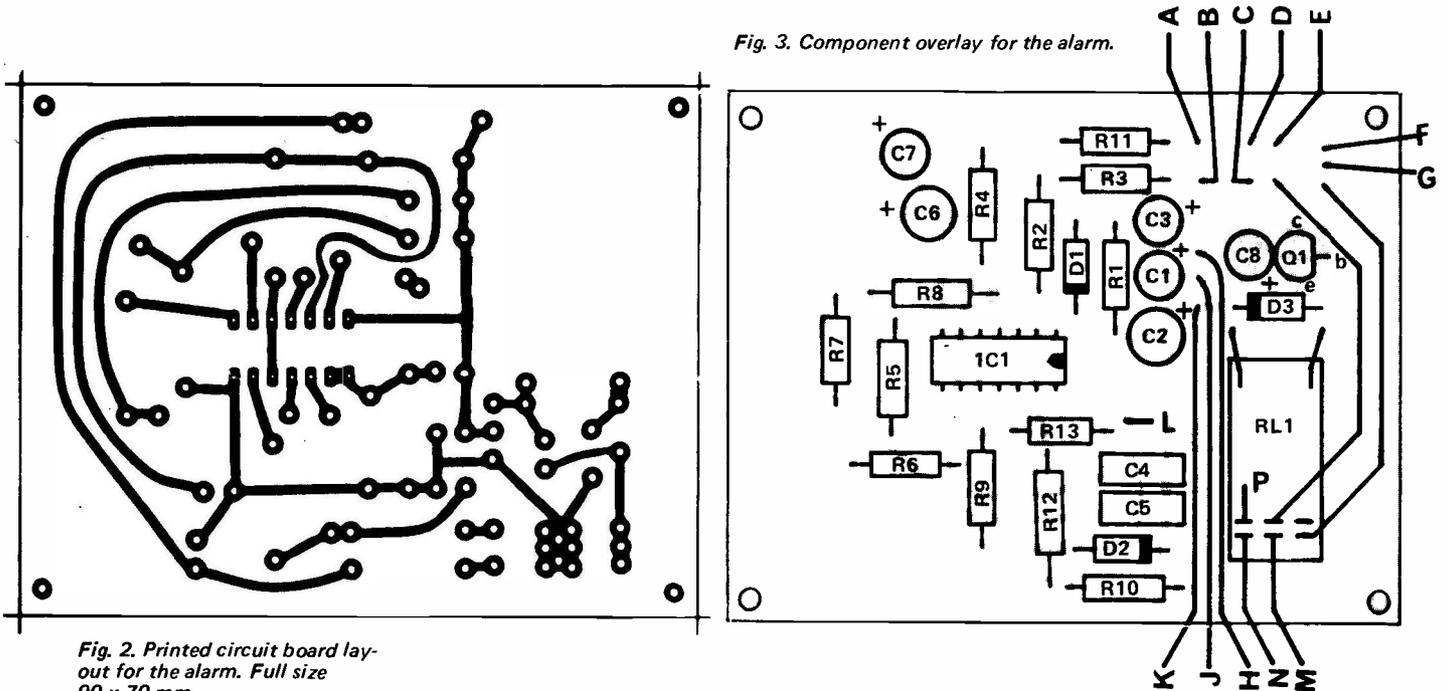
Printed circuit board layout for the alarm. Full size 90 x 70 mm.
